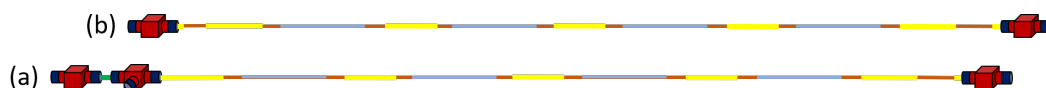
Ferrule-sleeve-nut assembling.
